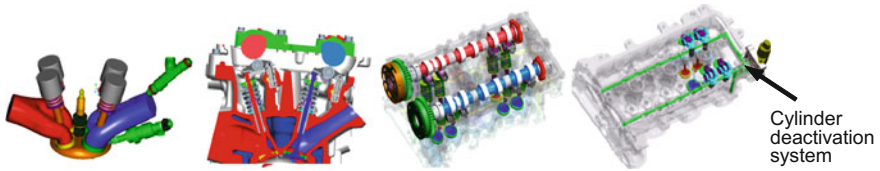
Combustion system, cylinder head and valve train of CA6GV
